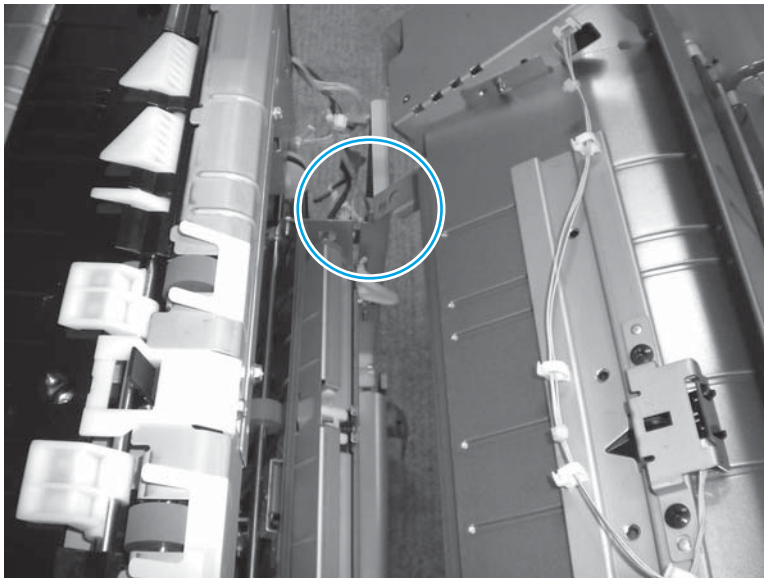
Remove the saddle feed assembly (7 of 7)
